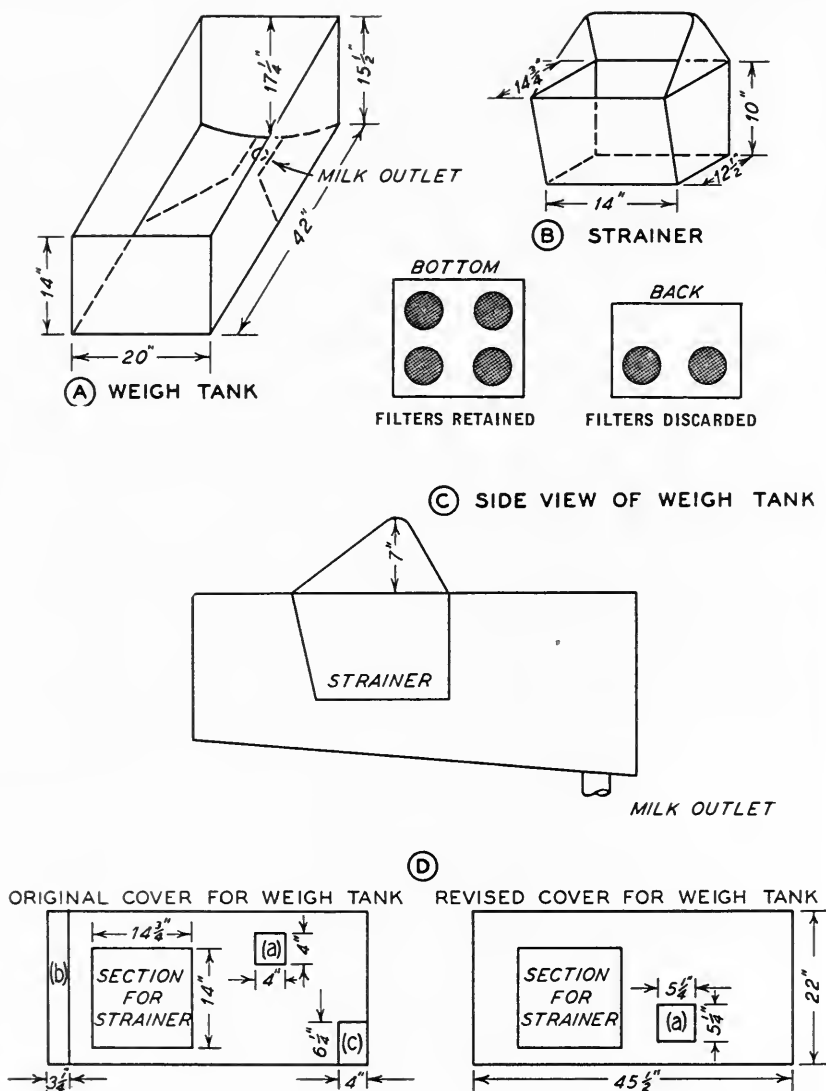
Construction details of weigh tank and strainer at Plant D
